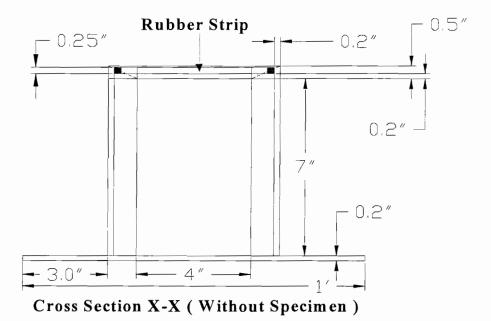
Cross Section View X-X of the Specimen Mounting Unit (without Test Specimen)
